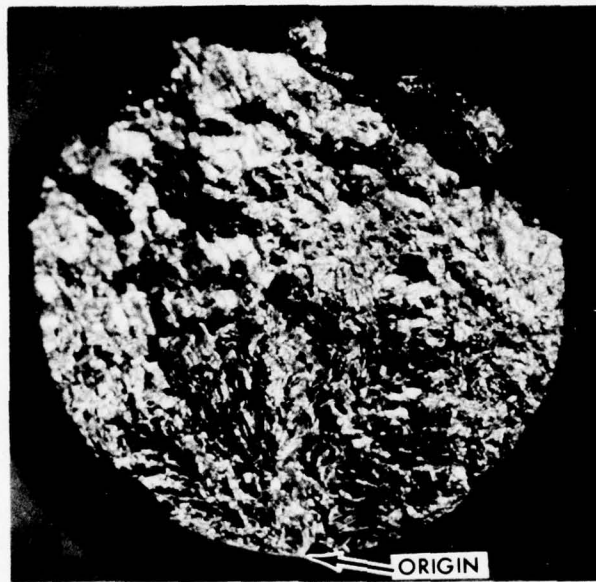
FATIGUE FRACTURE, TYPICAL BRITTLE FRACTURE SURFACE WITH ORIGIN ON O.D., TRIAL PANCAKE ASSEMBLIES. 12X
